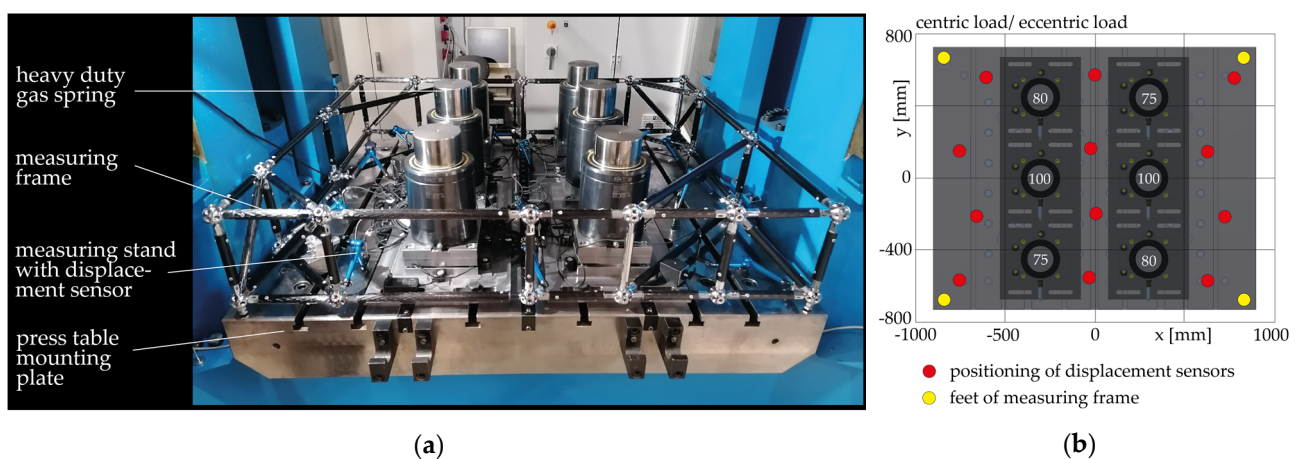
Measurement setup for conducting a comparative measurement on the bolster plate of the test object: (a) gas spring setup and measurement frame equipped with high-resolution measurement probes; and (b) positions of the measurement probes and support points (numbers 75, 80, 100 represent the stroke lengths of the gas springs).
